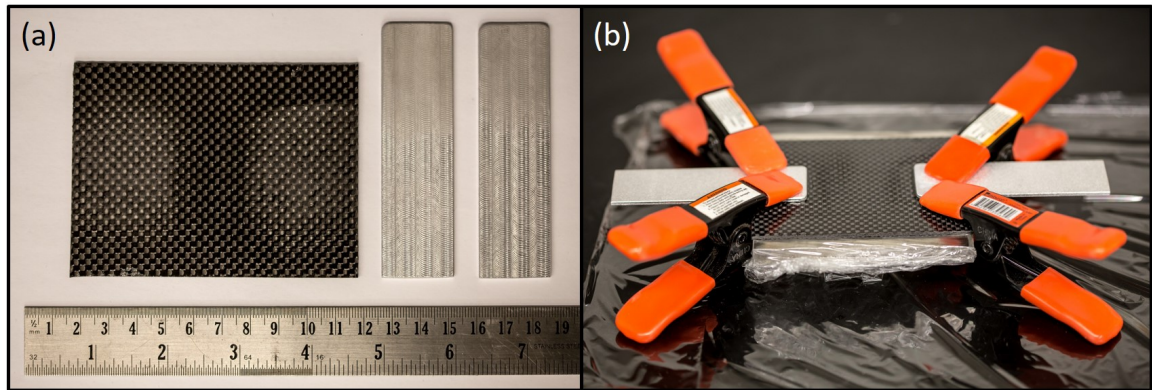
(a) Adhesive three-point-bend components, complete with treated jointing surfaces. (b) Clamping the three-point-bend adhesive components together.
